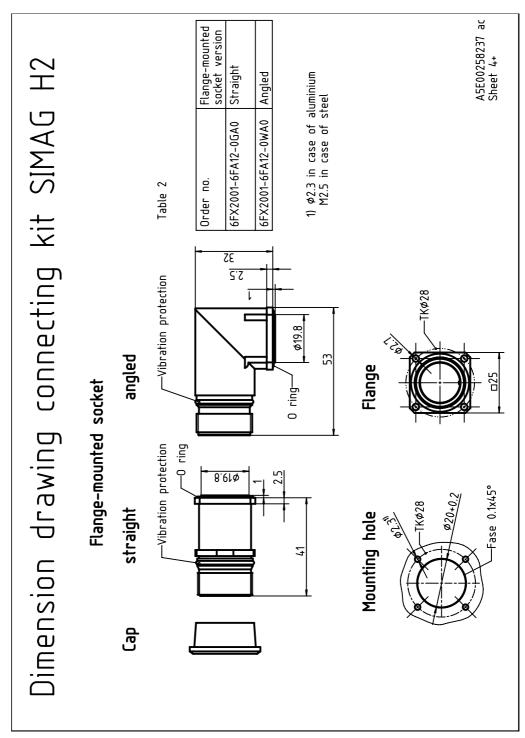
SIMAG H2 dimension drawing, connecting kit
